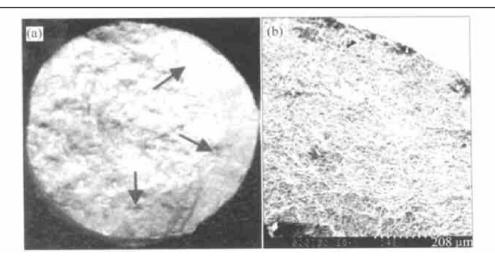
Fracture surfaces of fresh A356 tensile tested sample after filtration and EMS treatment (a) —Optical macrograph (arrow indicating cleavage fracture plane); (b) —SEM micrograph of fracture plane
